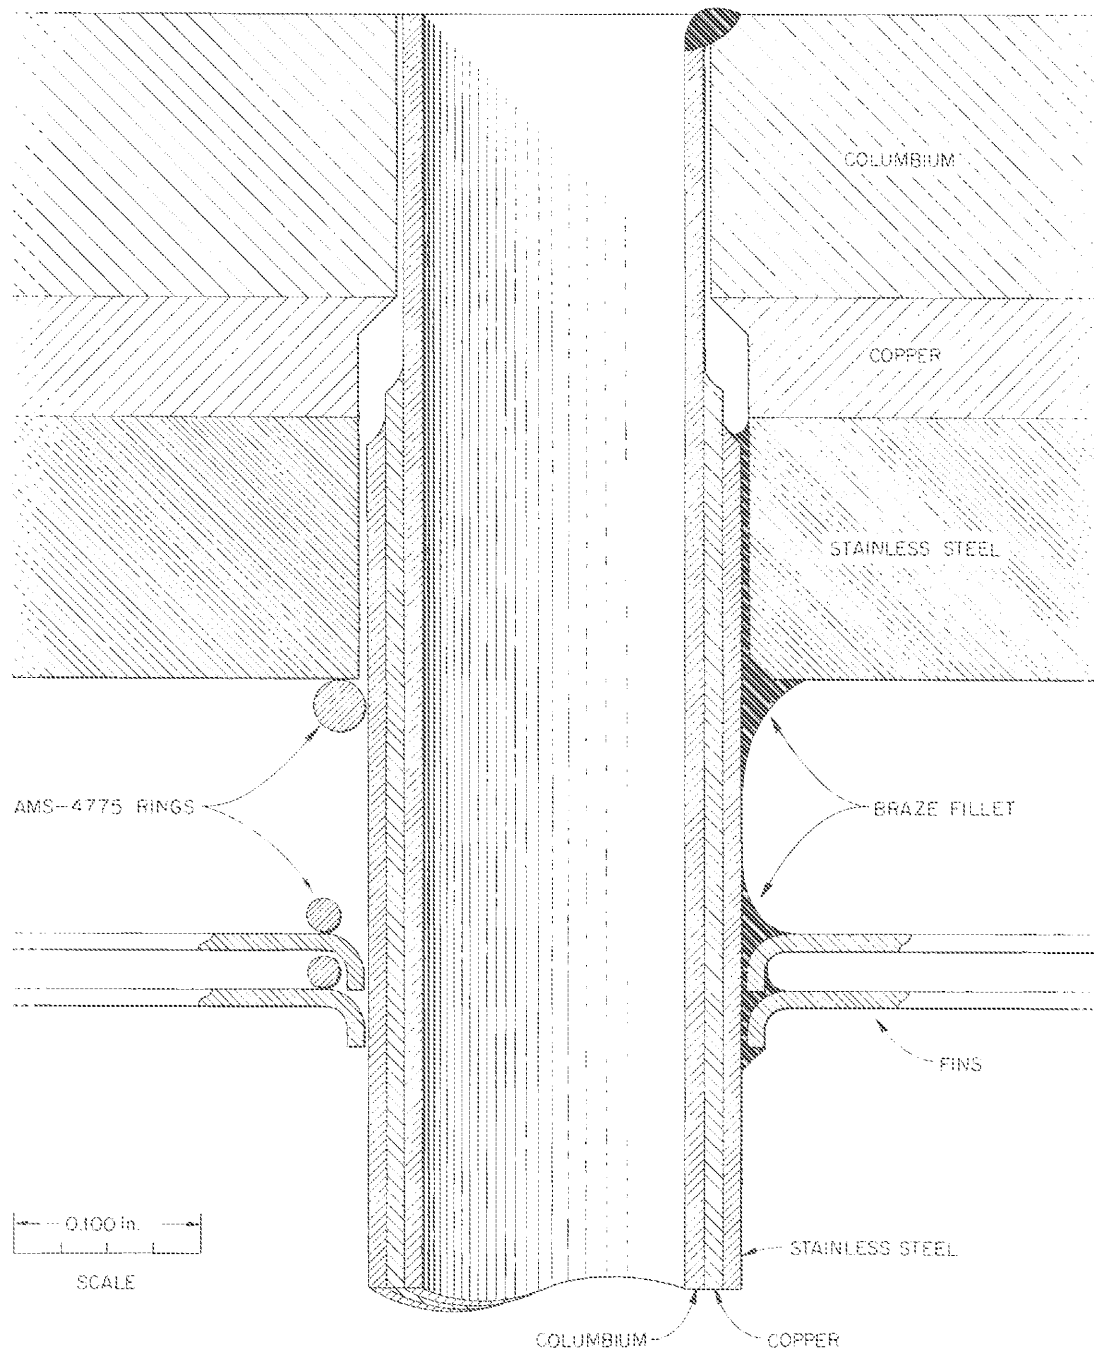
Tube Sheet Joint Design for a Stainless-Steel-Clad Columbium ART-Type Liquid Metal-to-Air Radiator.
